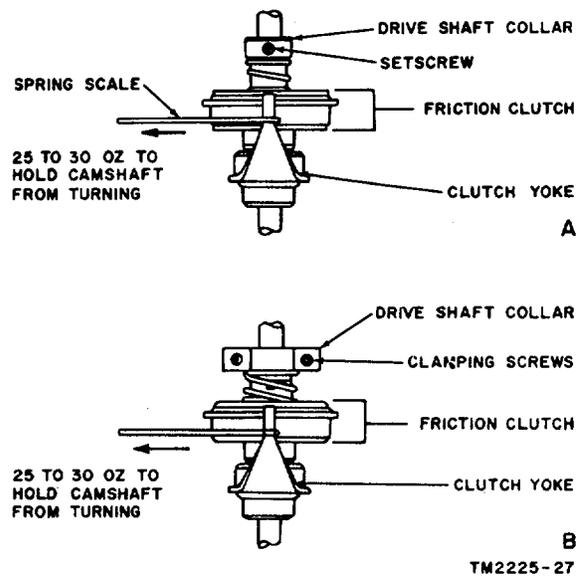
Keyboard-transmitter friction clutch adjustment.
